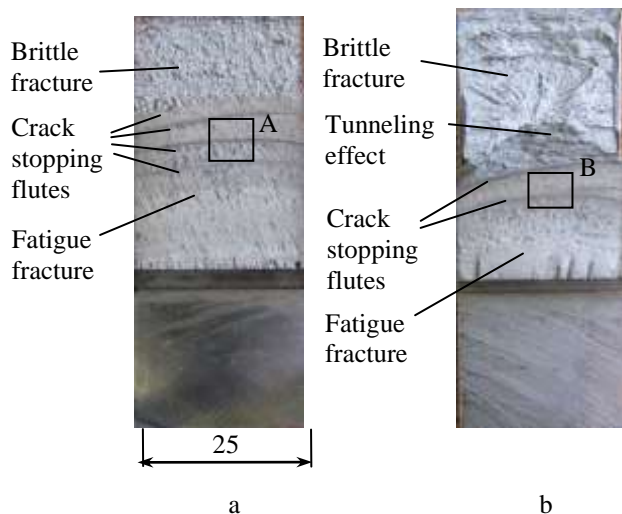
Fractures of specimens: a) St-1; b) St-2
